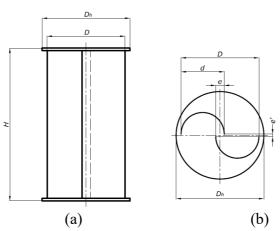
Scheme of a single stacking Savonius rotor. (a) Front view; (b) Top view (conventional Savonius rotor : e'=0) [6]
